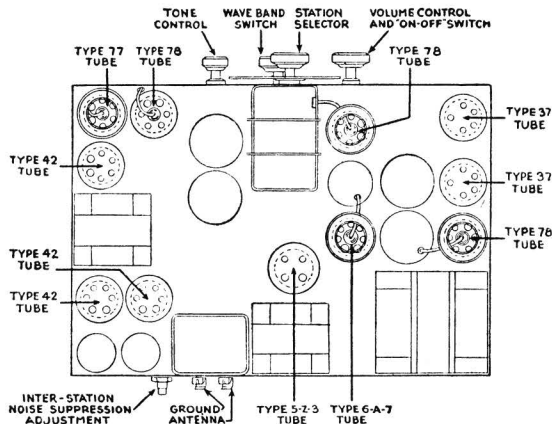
Top View of Chassis, showing Tube Locations, and Major Parts
